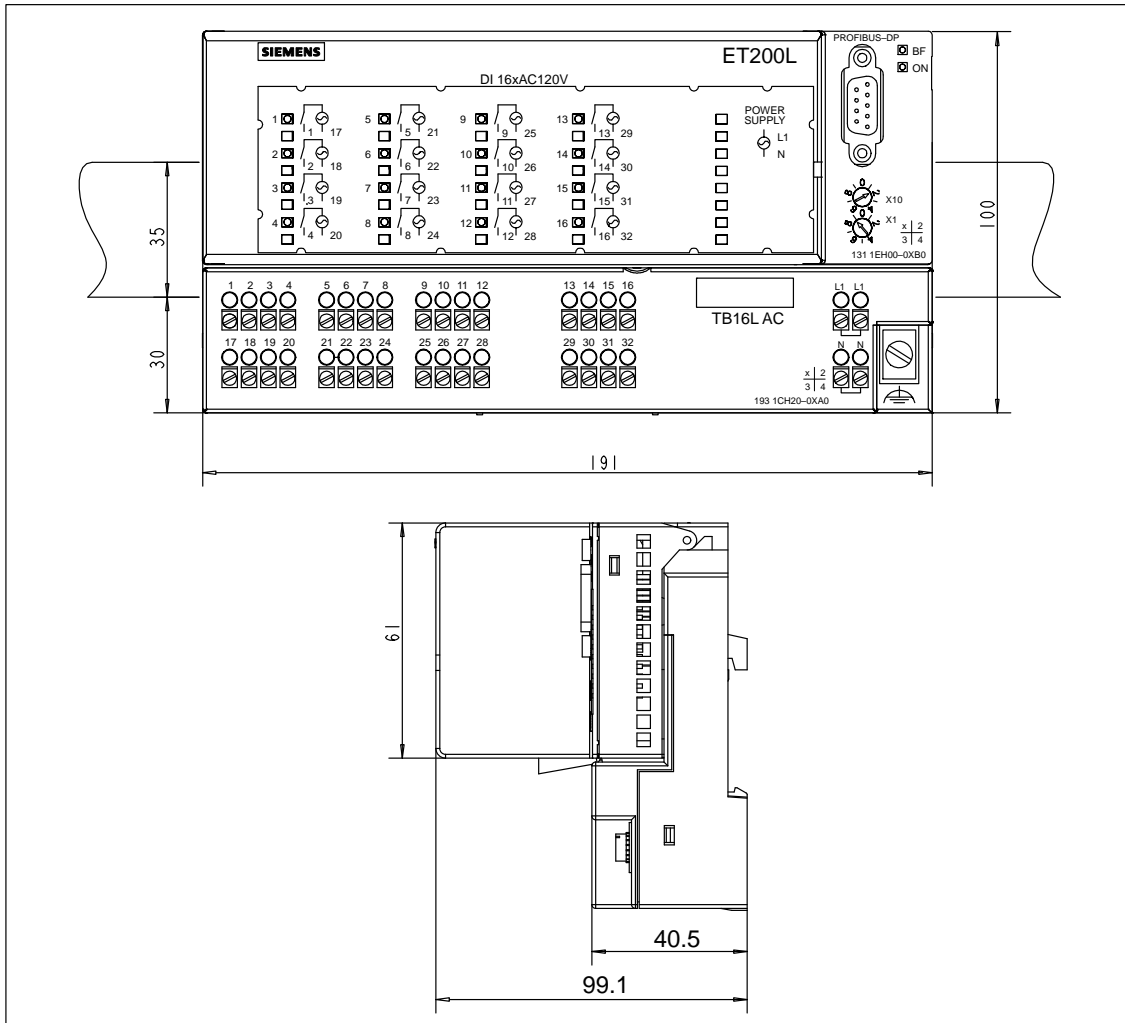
The TB 16L AC Terminal Block with the Electronics Block Mounted, Dimension Drawing (mm)
